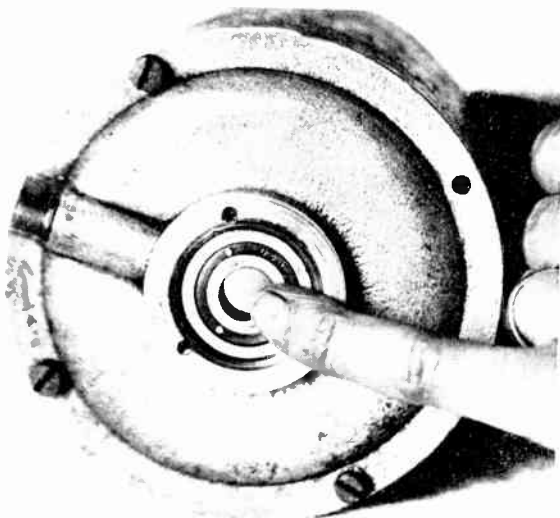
TESTING INNER RING OF BALL-RACE FOR FREENESS.
